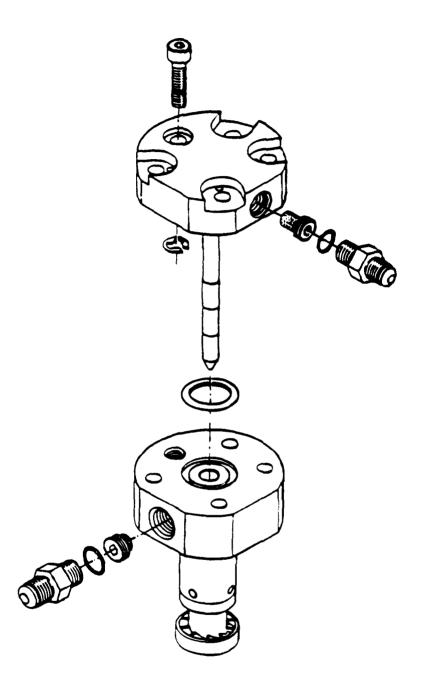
Two-piece fuel nozzle for AGT-1500 gas-turbine engine (current production version)
